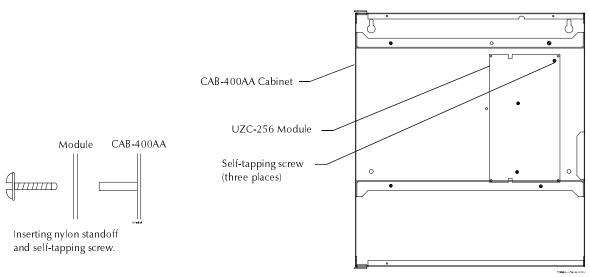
Mounting the UZC-25 into a CAB-400AA Cabinet
